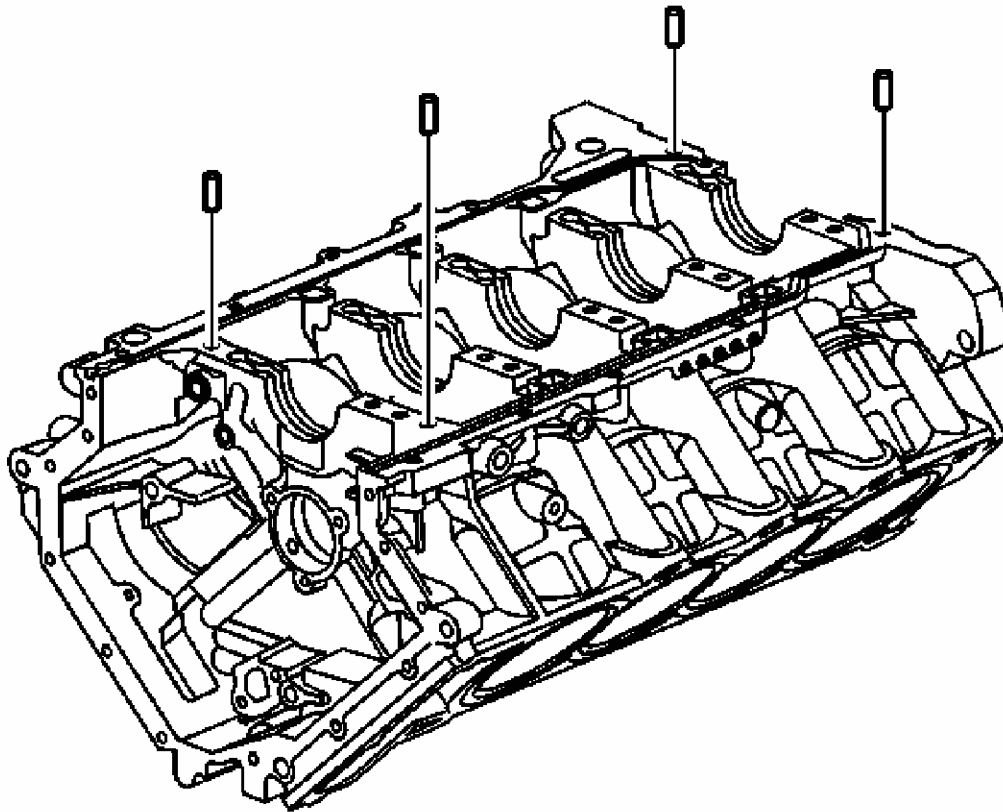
Identifying Lower Crankcase Locating Dowel Pins
